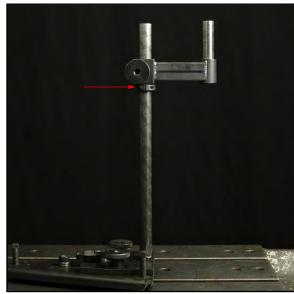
RADIAL MOUNT ON THE MOUNTING ROD
